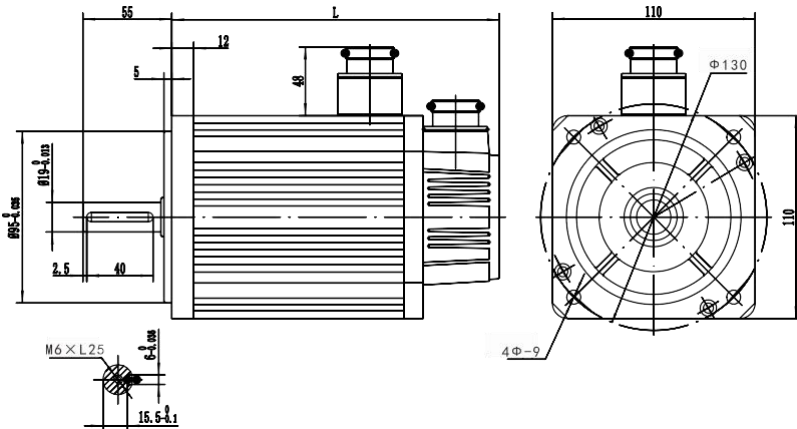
Installation dimension drawing of 110 flange servo motor
